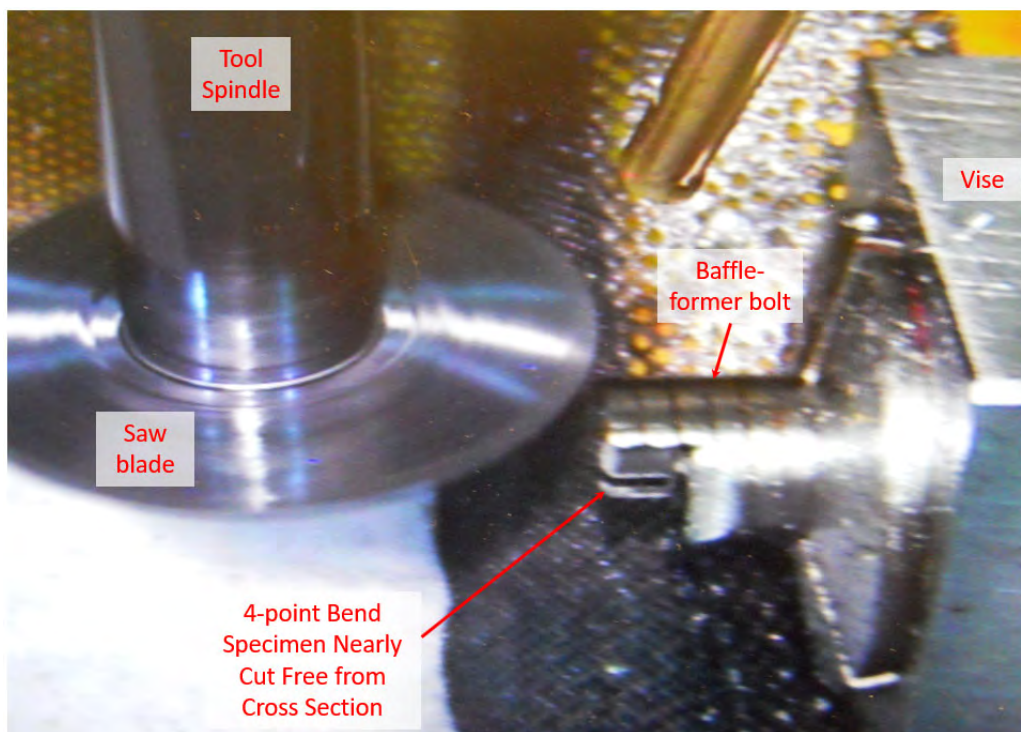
View within CNC machine, within M Cell, showing 4 point bend specimens being cut free from the bolt
